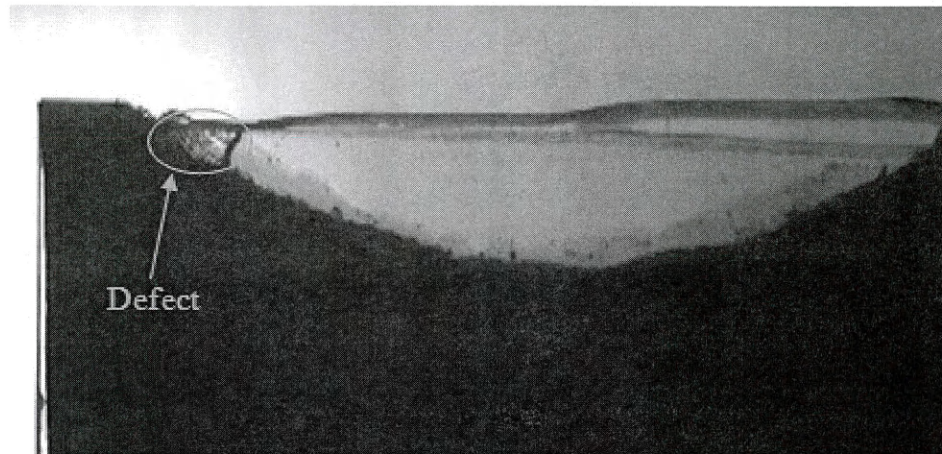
Unfilled Joint End Illustrating Incomplete Filling at Terminal End of Flow Causing Fillet-Type Defect and Additional Filler Accumulating Above Top Surface of Joint
